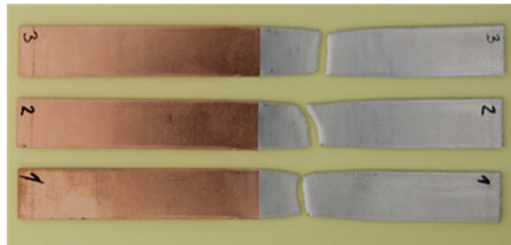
Specimens after tensile test (dimensions of specimen: 114 mm x 12,9 x 1,9 mm)
